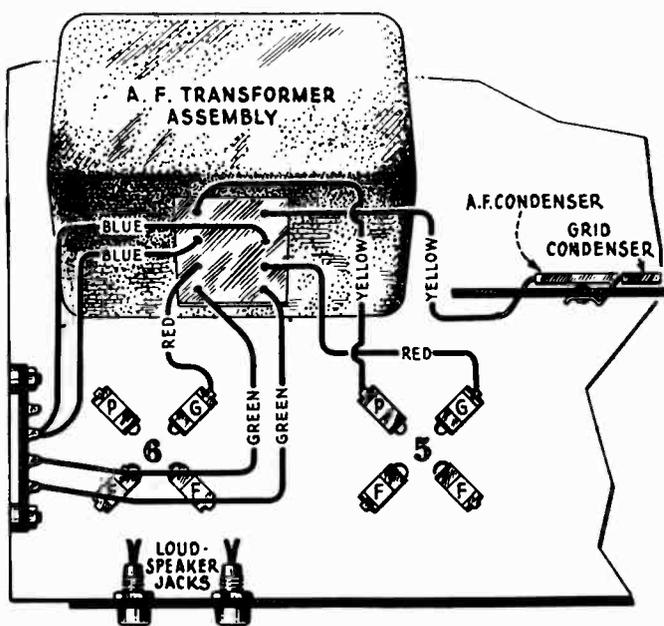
Detail of A. F. transformer connections and color scheme of wiring.
